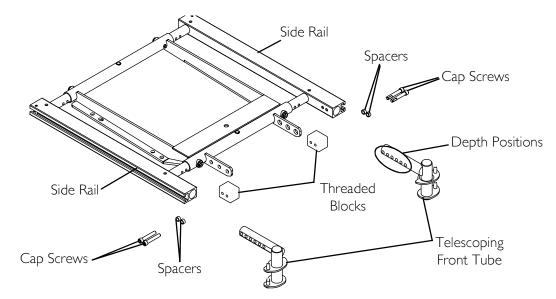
Adjusting/Replacing Telescoping Front Rigging Support
